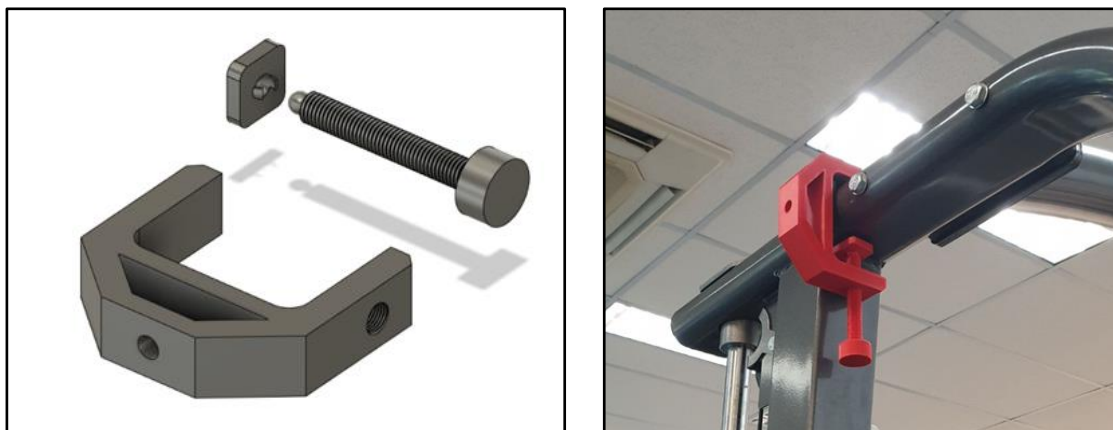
CAD Model (Left) and the 3D Printed C-Clamp Mount (Right)
